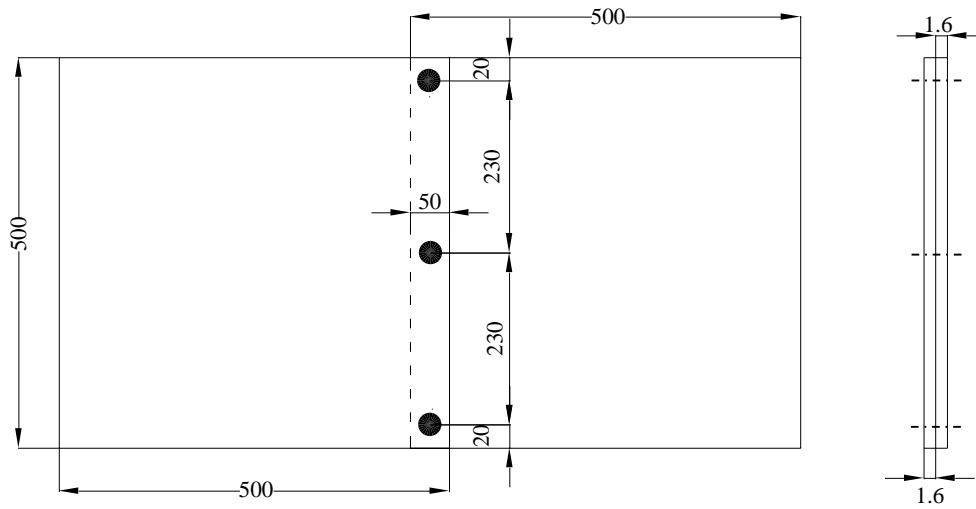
Geometric dimensions of plates with spot- welds
